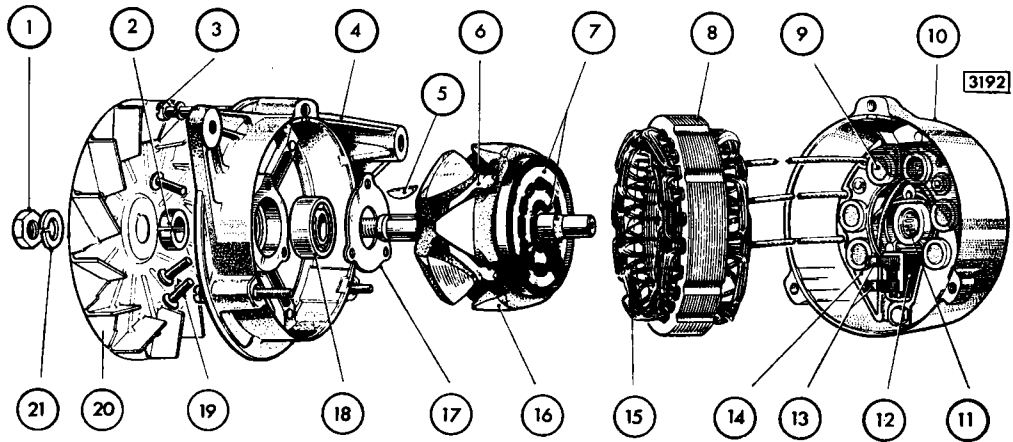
Exploded view of the Lucas 11AC alternator
